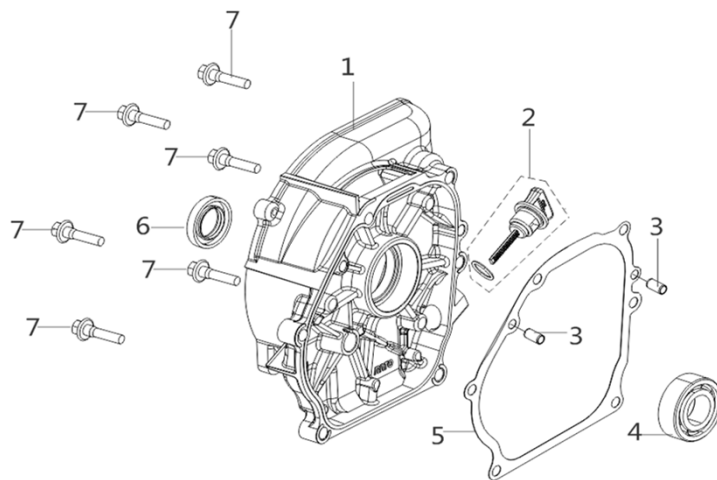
CRANKCASE. / GEAR ASSY, GOVERNOR. 曲轴箱体部件 + 调速齿轮部件(E02)
